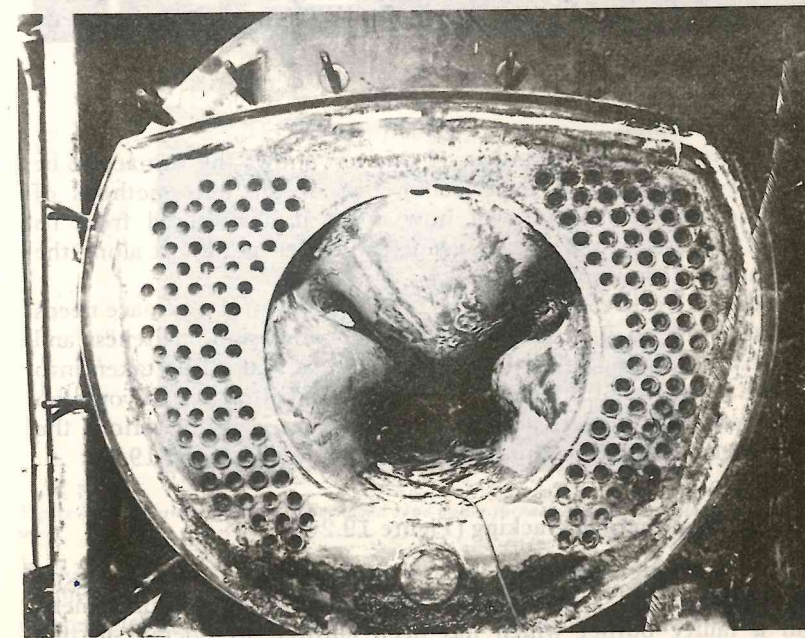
Water shortage caused this packaged type boiler furnace to overheat and collapse
